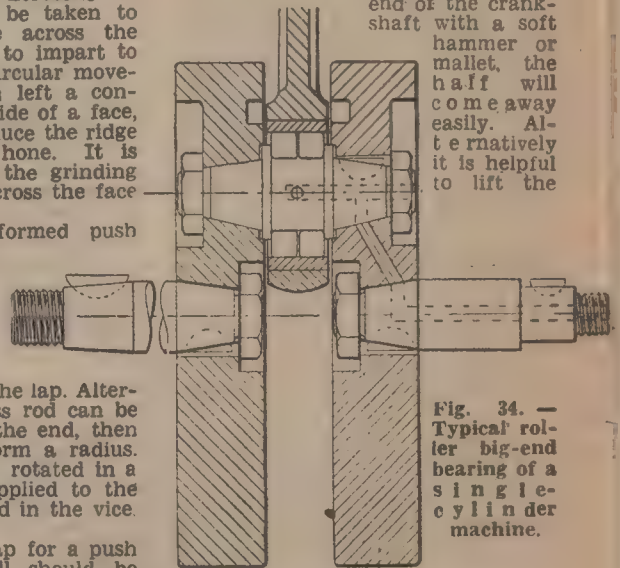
Typical roller big-end bearing of a single cylinder machine.
